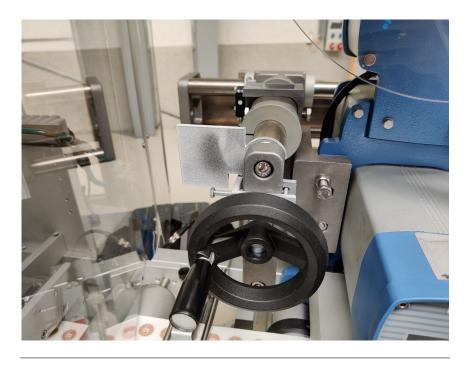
Retrofitted X-Adjustment sensor on the machine
